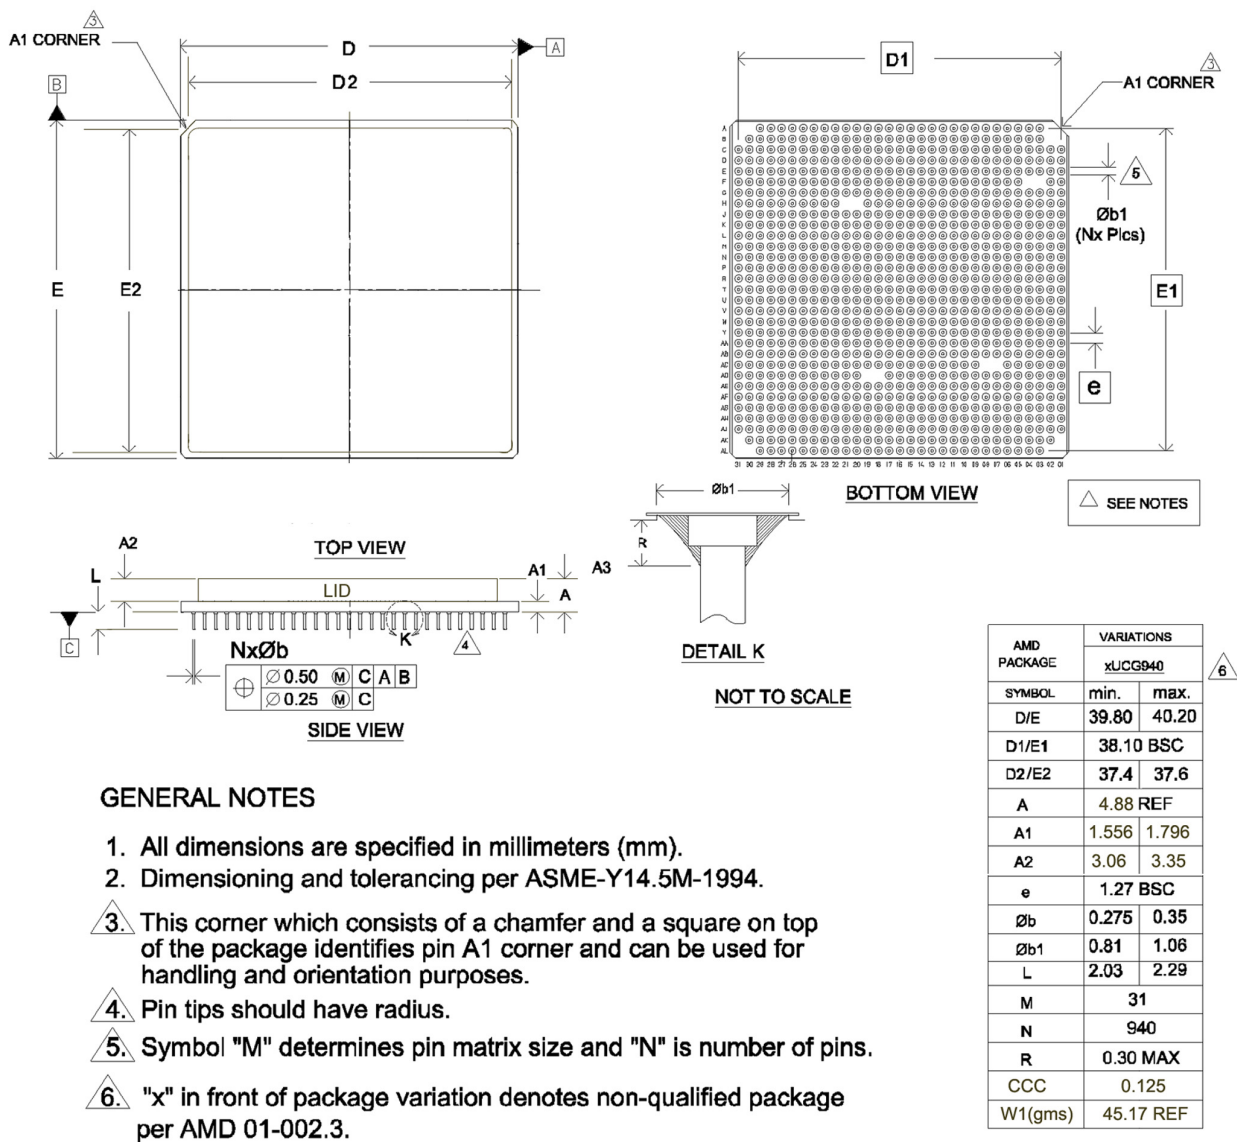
940-Pin Ceramic μ PGA Package Drawing
